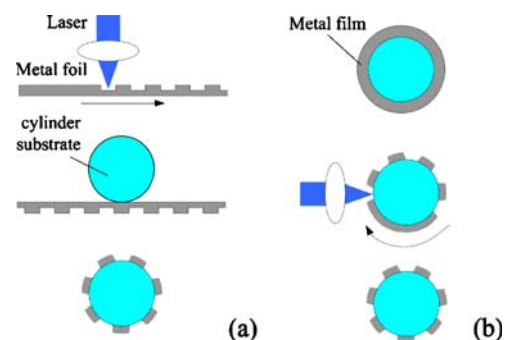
Sketch diagrams for the fabrication of two-layer structure roller. (a) Sticking patterned foil on cylinder. (b) Patterning metal-coated cylinder surface
